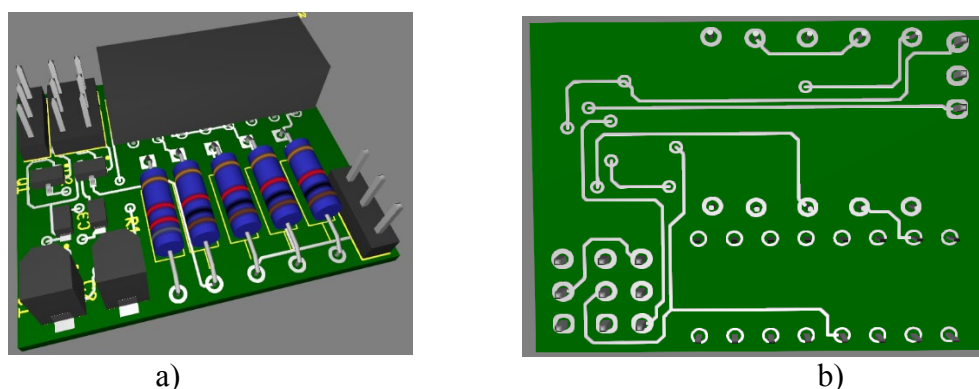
3D model of the inverter PCB in Ultiboard, a) top view; b) bottom view
